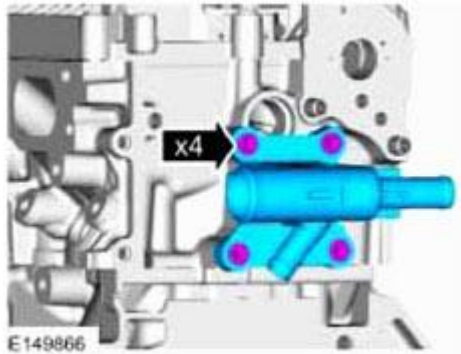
Locating Coolant Outlet Connector Assembly Bolts
